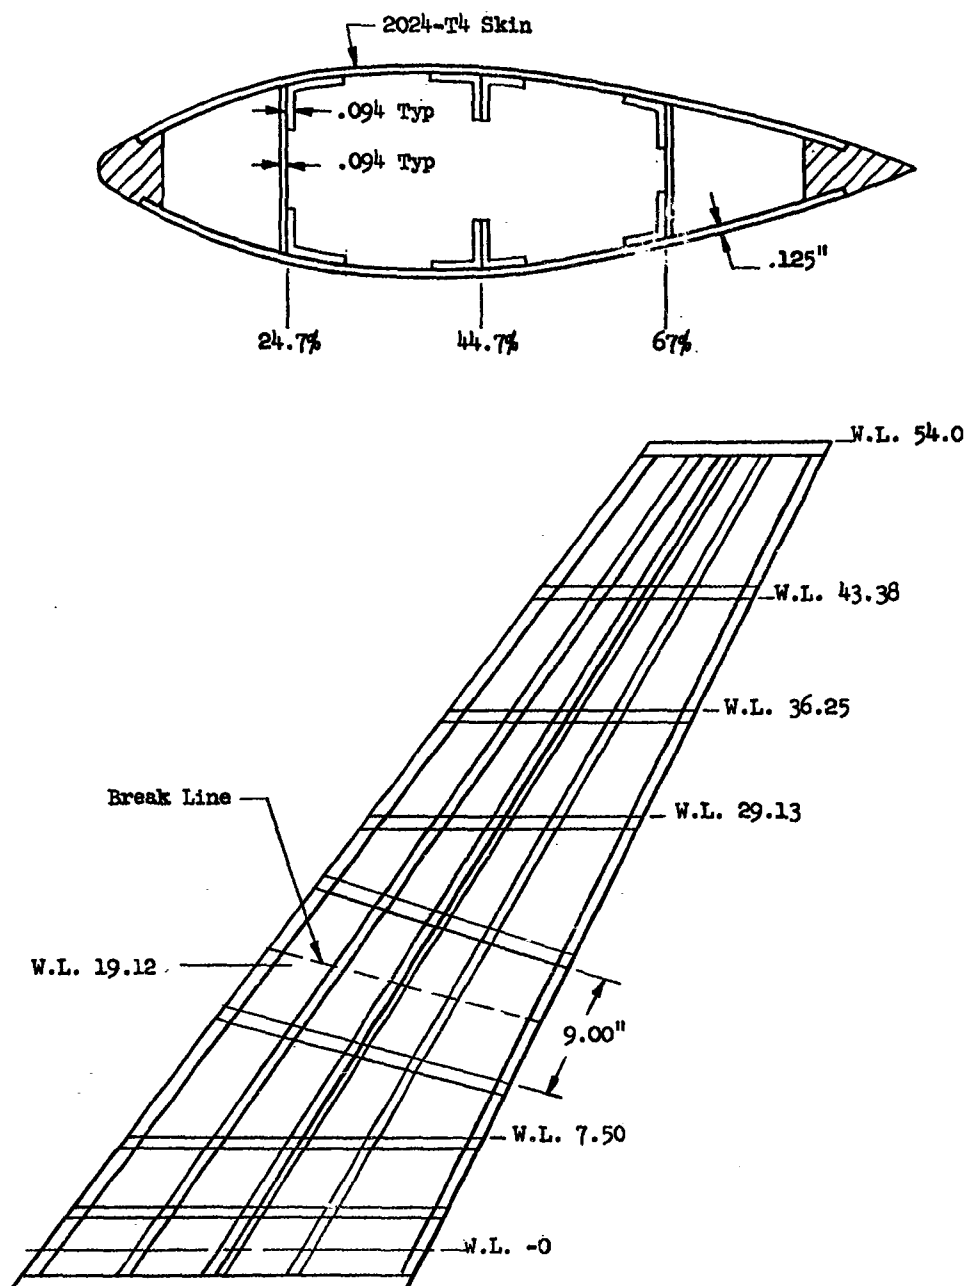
STRUCTURAL SPECIMEN- FIRST PRELIMINARY TRIAL
